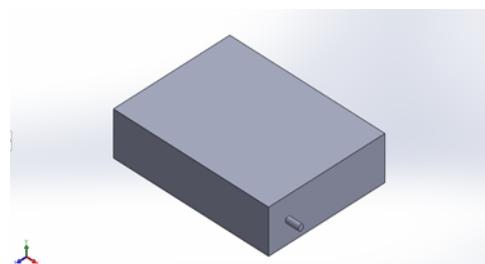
The enclosure to house the pipe is created with the help of extrude tool and forms the complete model of solar flat plate collector with smaller passage diameter
